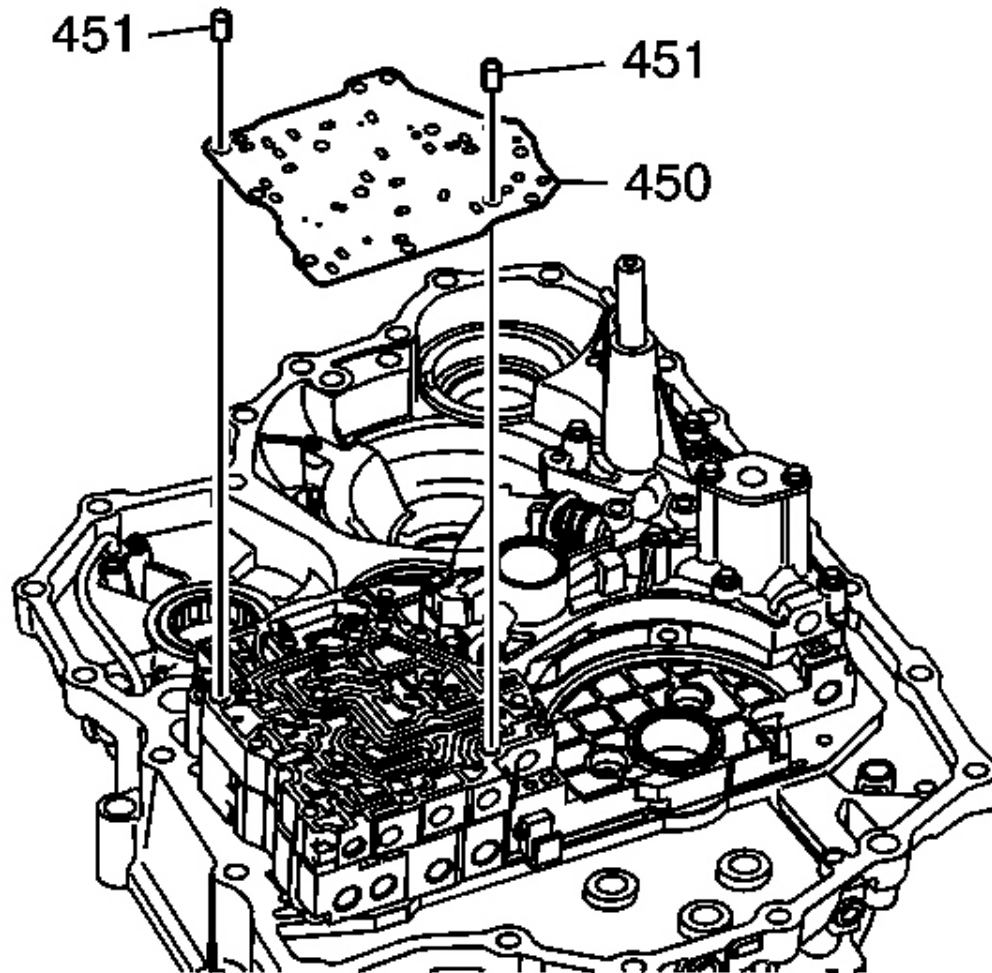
Accumulator Valve Body Spacer Plate & Locating Pins
